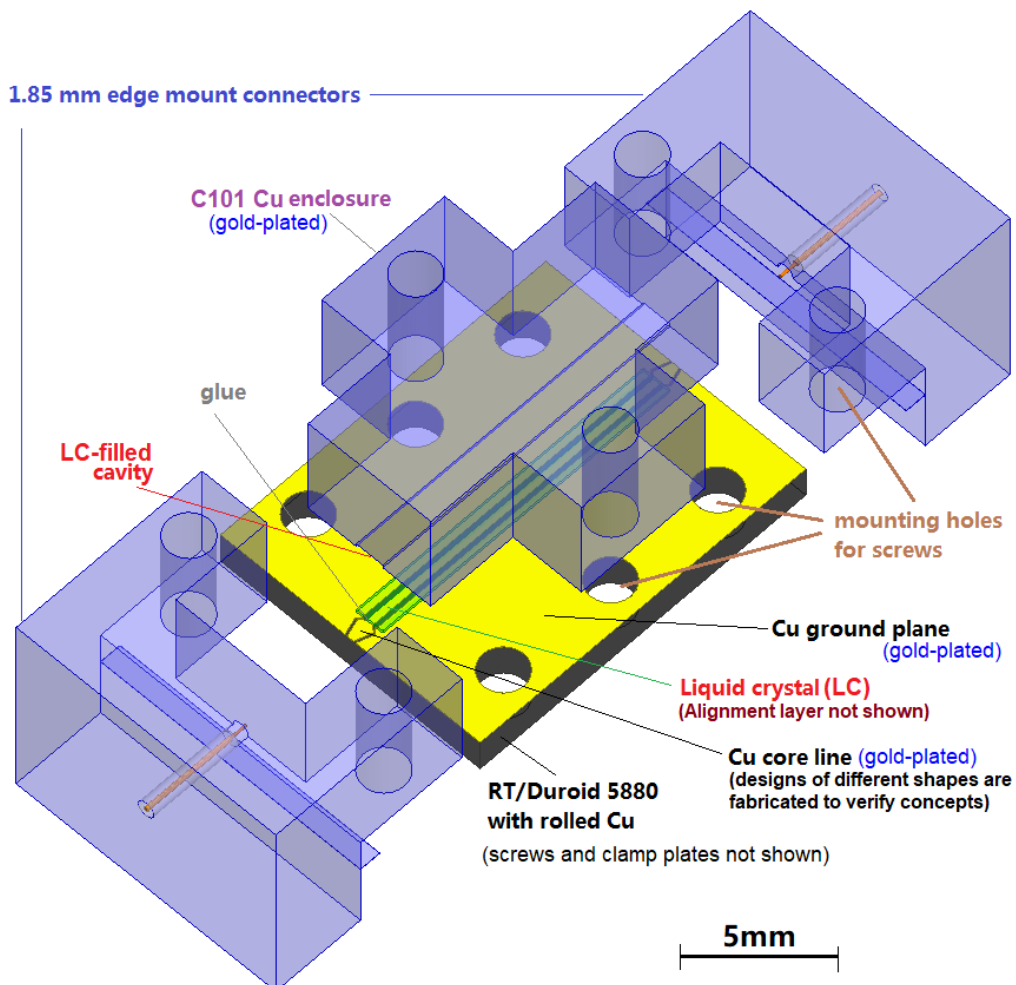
Exploded View of the Proposed LC-filled ECPW Phase Shifter
